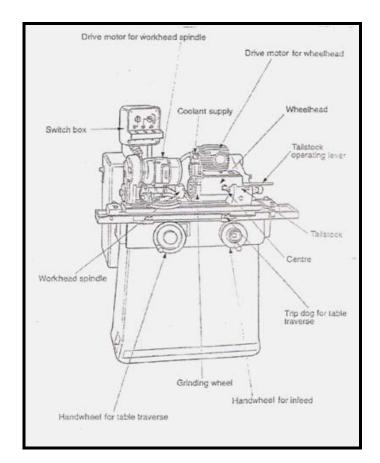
Universal Grinding Machine Showing Operating Controls and Principal Parts
